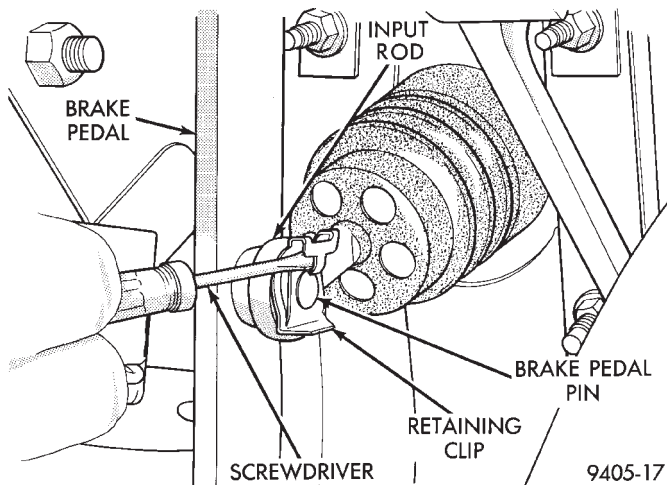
Vacuum Booster Input Rod Retaining Pin
